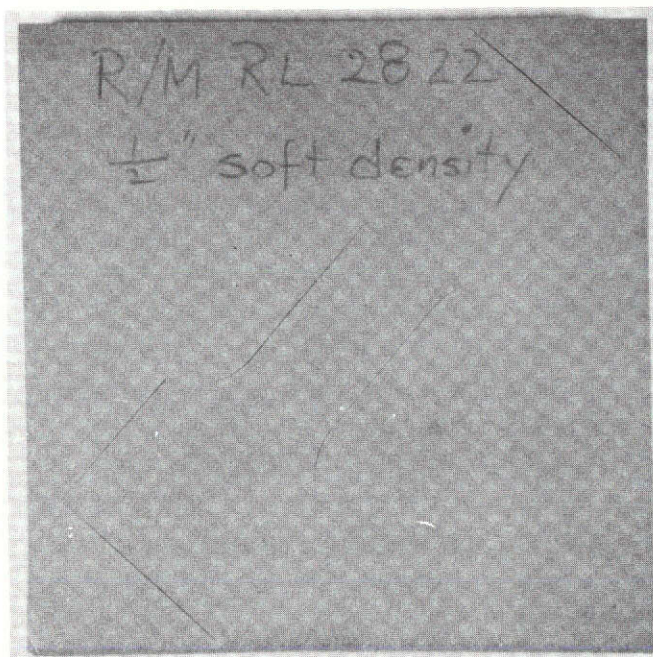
Raybestos-Manhattan RL-2822 (.34 gm/cc, 21.3 pcf) cut with die cutting tool from 6.35 mm (0.5") thick sheet.
